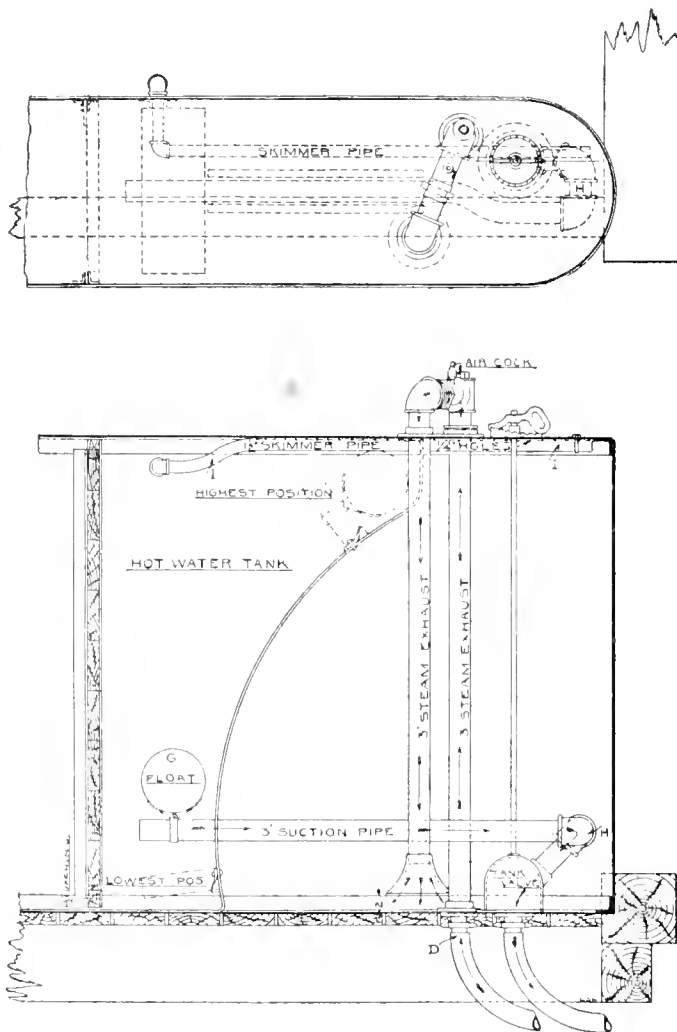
Arrangement for Exhaust Steam in Tank.
